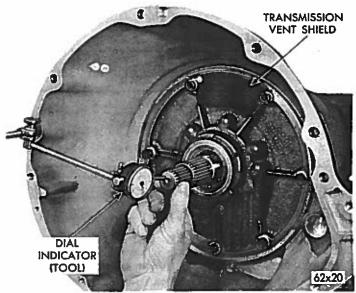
Checking Drive Train End Play (Tool C-3339)
